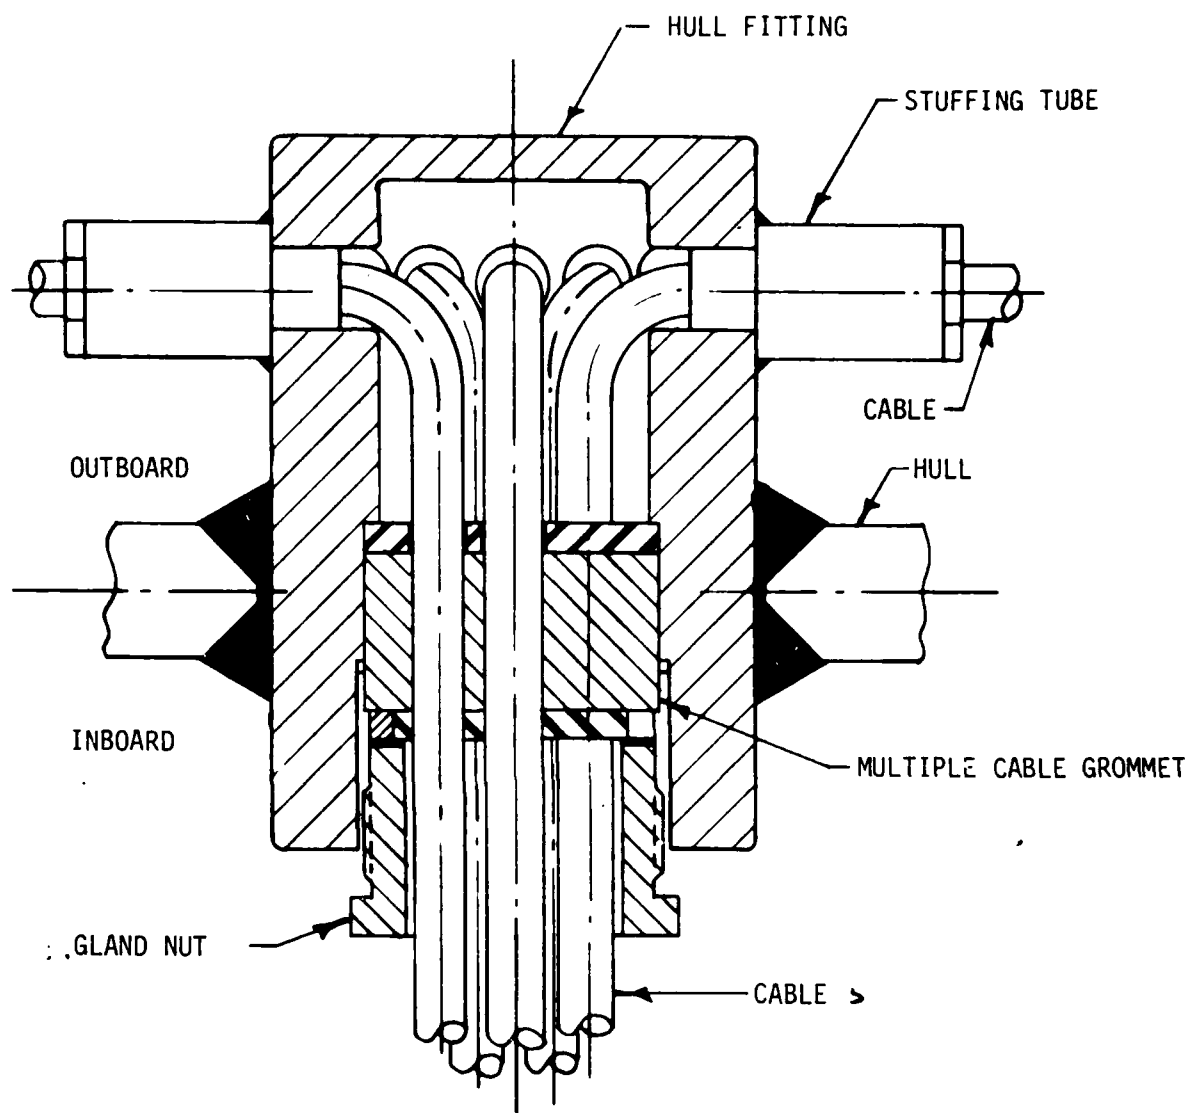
MULTIPLE CABLE STUFFING TUBE HULL PENETRATOR
